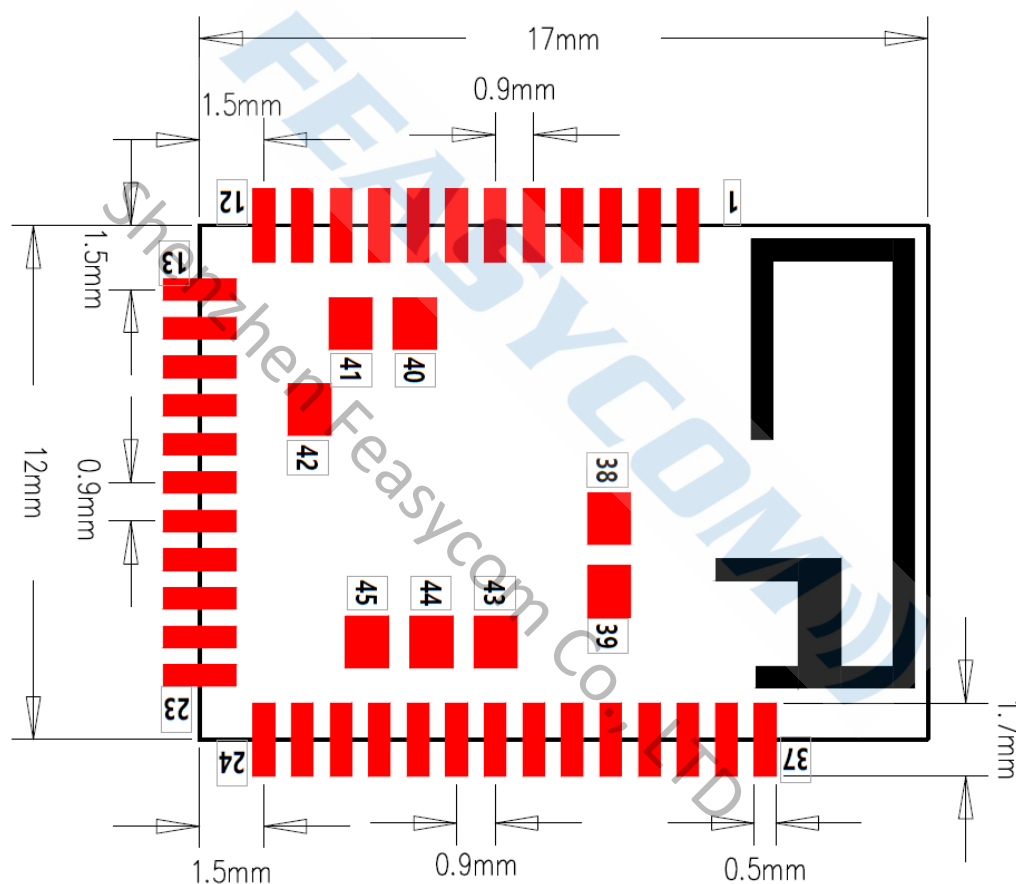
FSC-BT1114QI footprint Layout Guide (Top View)
